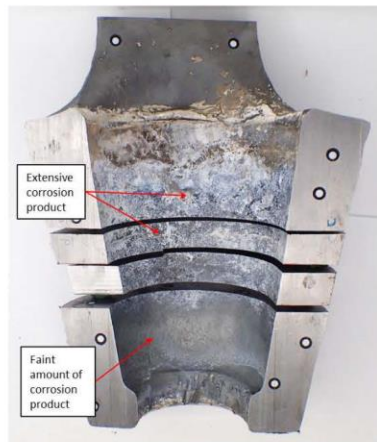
3 o'clock side of the inner diameter socket wall, showing the surface behind the outer diameter of the zinc casting.
